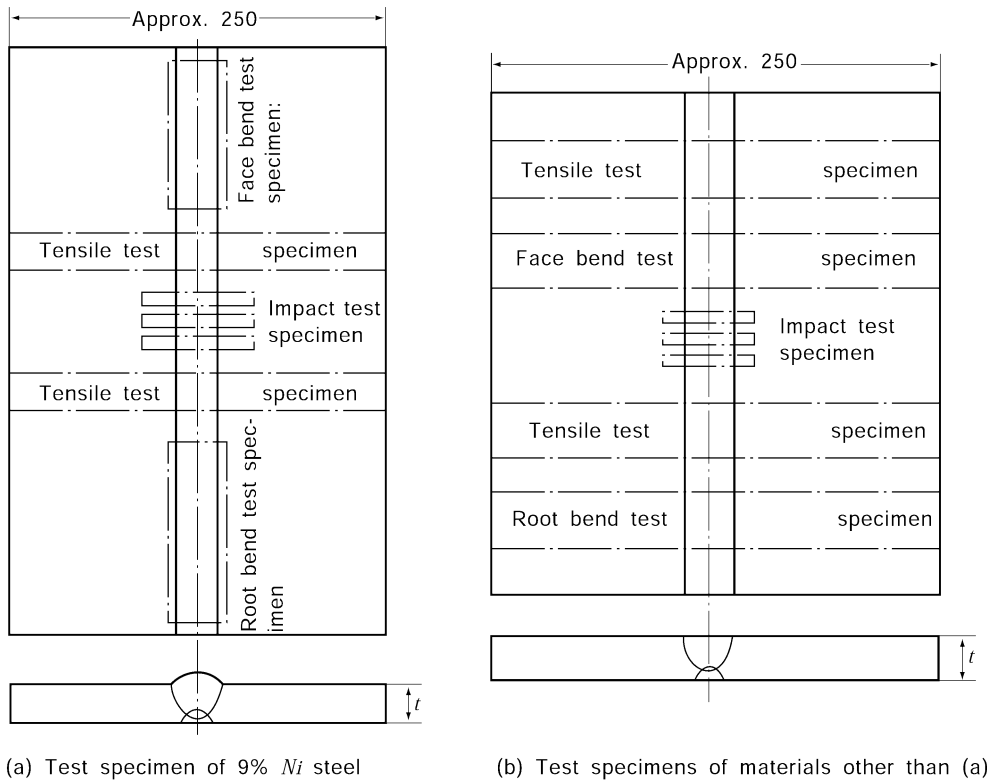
Test Specimens for Production Weld Test (Units : mm, thickness  $t$  )
